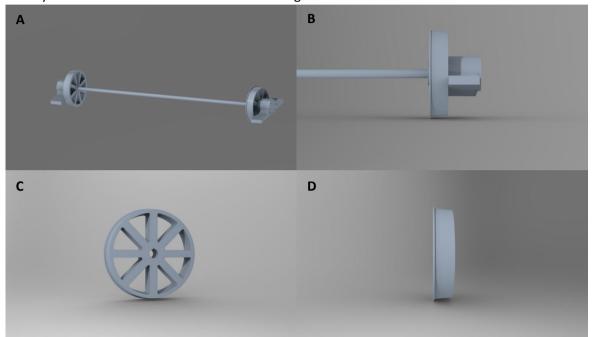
CAD models of the axle assembly and wheels: (a) the axle assembly; (b) the wheel assembly; (c) the wheel itself; (d) side view of the wheel model.
